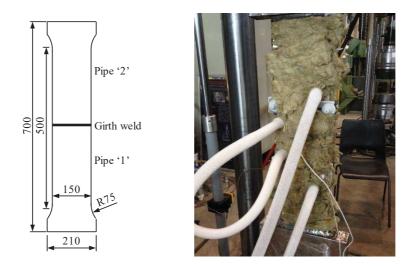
(a) Geometry and nominal dimensions of a Medium Wide Plate specimen. (b) Cooled specimen, insulated by means of Rockwool. White cables indicate the presence of thermocouples to monitor weld temperature during testing.
